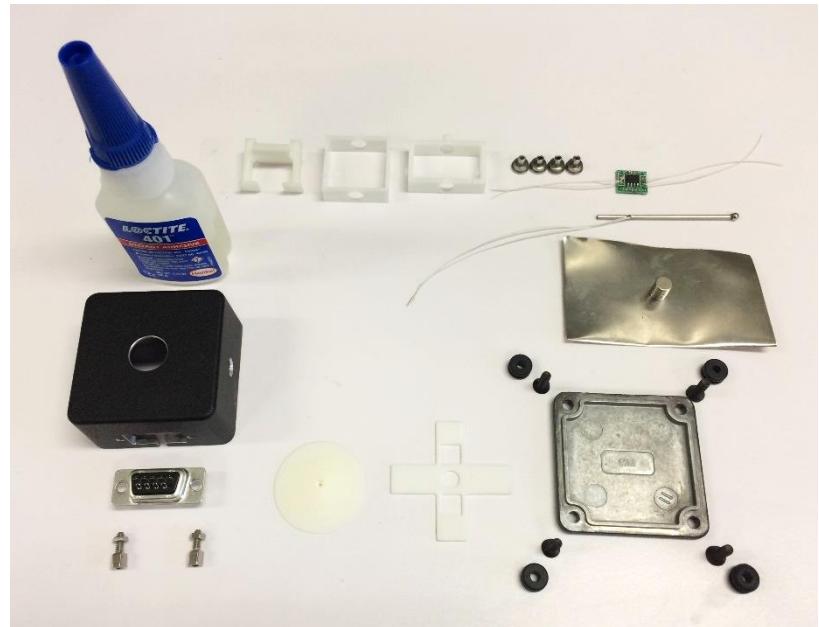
Materials for assembly of joystick. Clockwise from top left: Superglue, gimbal pieces, bearings, Hall sensor, electrode, magnetic tape, magnets, baseplate w/ screws & grommets, cross, umbrella, DB-9 connector & screws, and housing top. Not pictured: 1/4-20 x 1" mounting bolt
